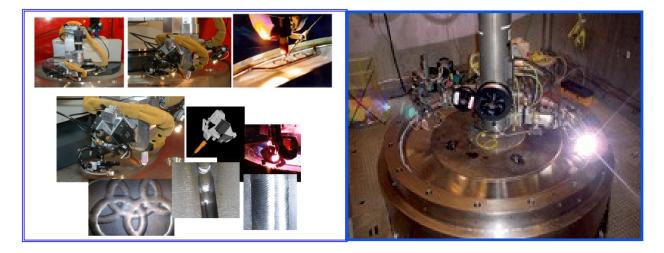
Representative Fuel Canister Automated Welding System , Welds & Fuel Canister Cutting Images
